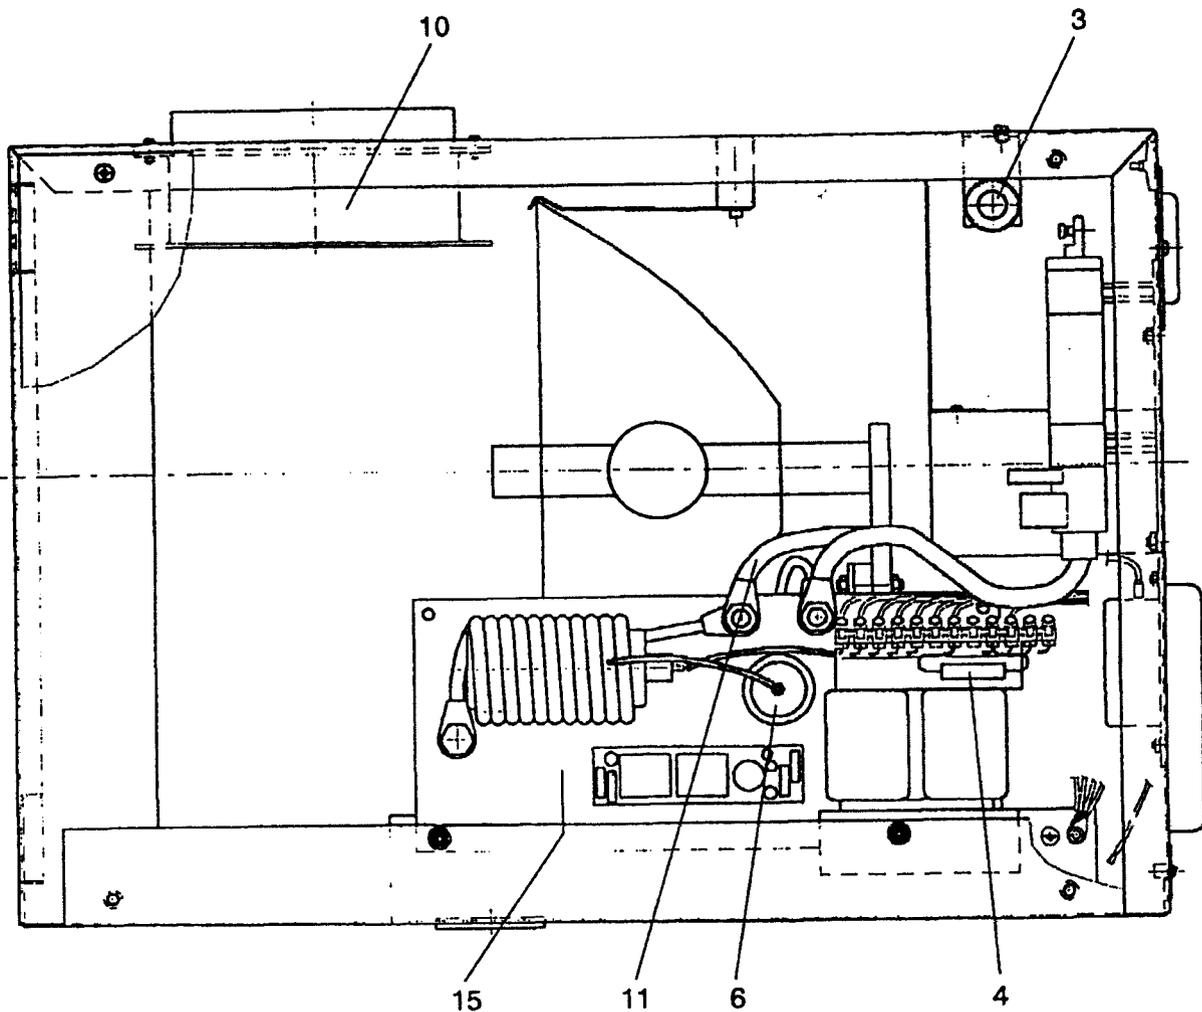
Lamp House XENOSOL 2000, Side View, Device opened, Position of Spare Parts
